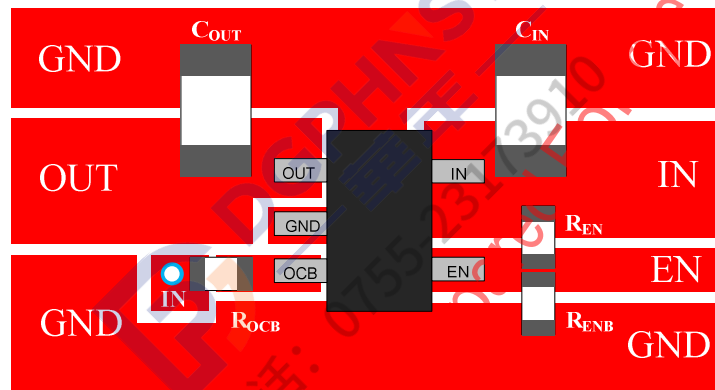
SY6861A1/A2 PCB Layout Suggestion
